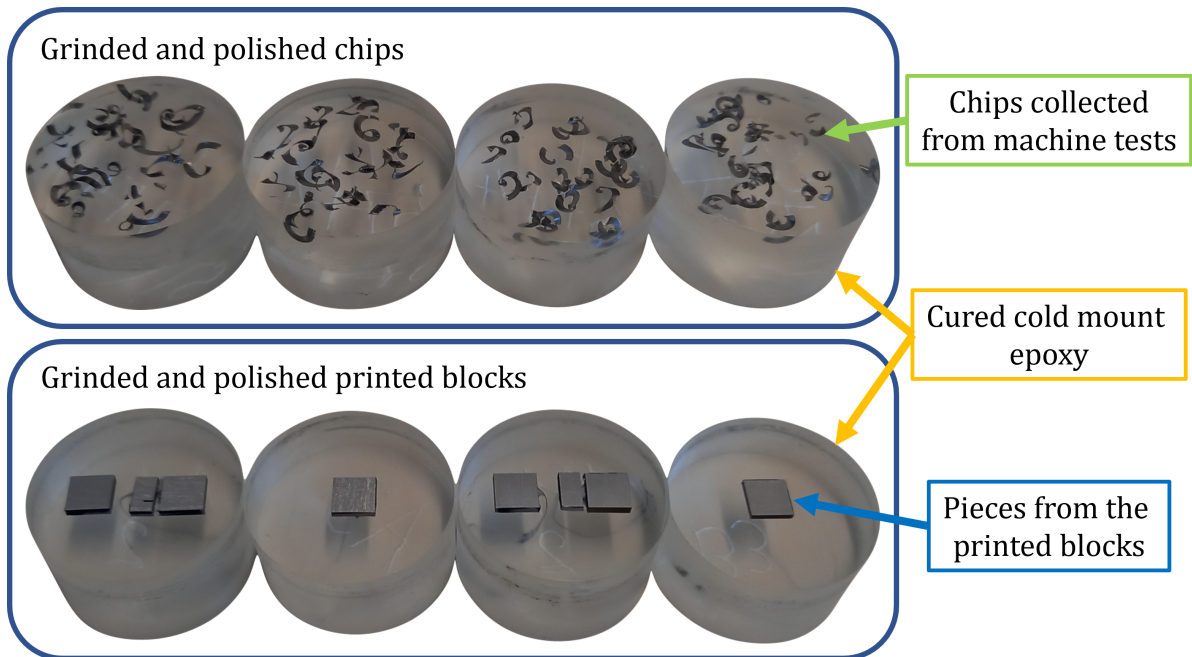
Cold mounted samples for AM and wrought titanium chips from machining tests and pieces from machining blocks
